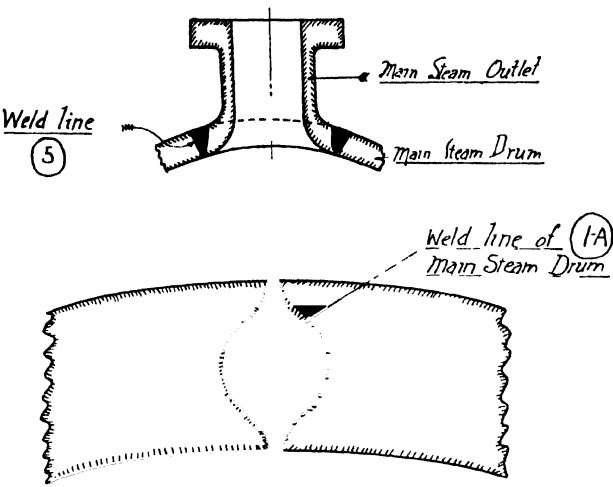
Enlarged section of main steam drum through weld.
